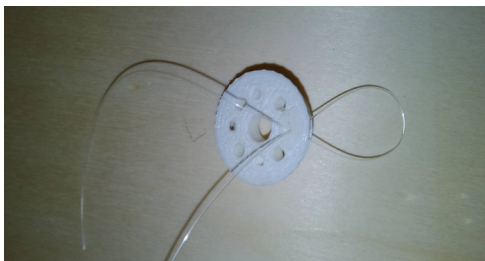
Threading the ends of the nylon thread, one at a time, through the hole
